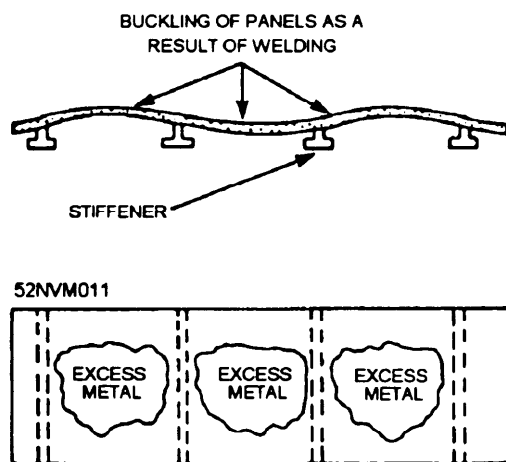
Flame shrinkage used to control distortion of panels with welded stiffeners.
